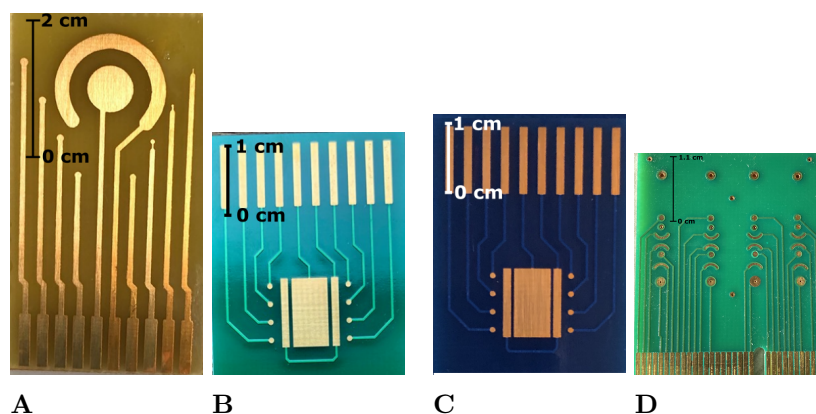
PCB P1 (A). Commercially fabricated and hard gold plated PCB P2 (B). New design to increase efficiency and allow for accessory addition. Commercially fabricated bare copper PCB P3 (C). Same in design as B but obtained without gold plating. PCB P4 (d).
